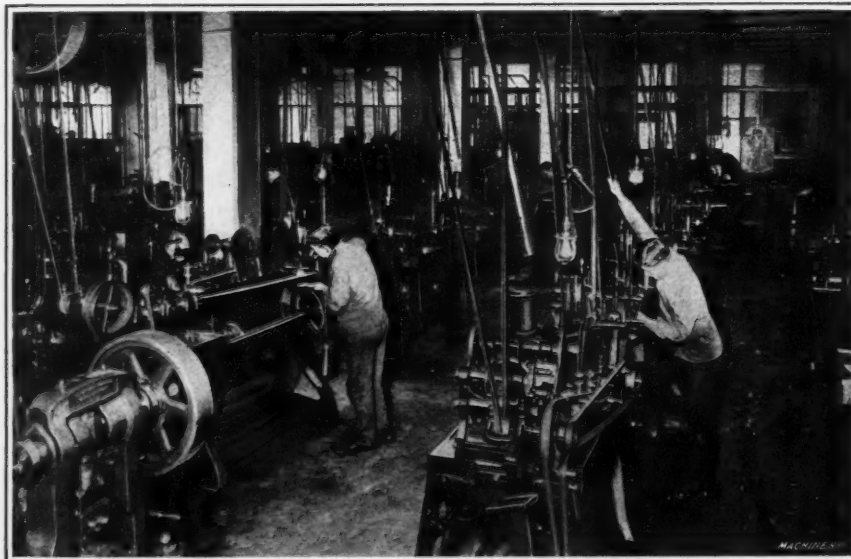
General View in Shop of Keller Mechanical Engraving Co.
